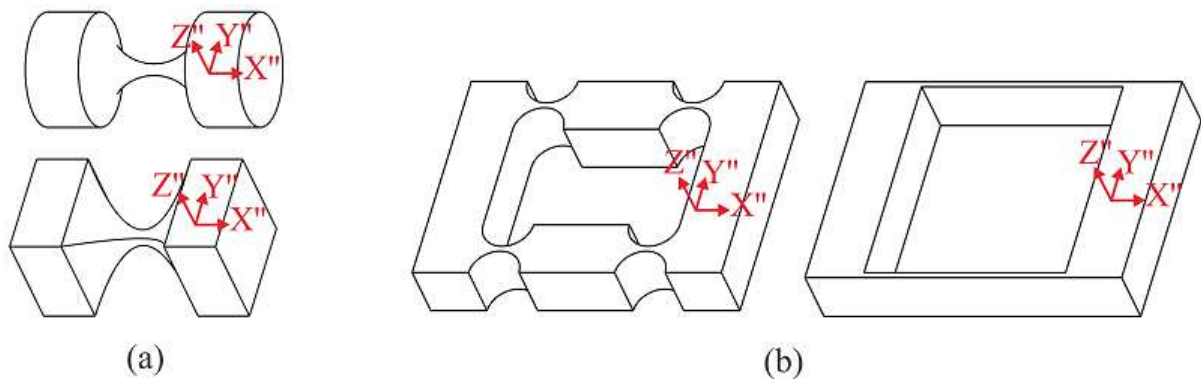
Flexure elements (a) spherical joint, (b) linear spring.
